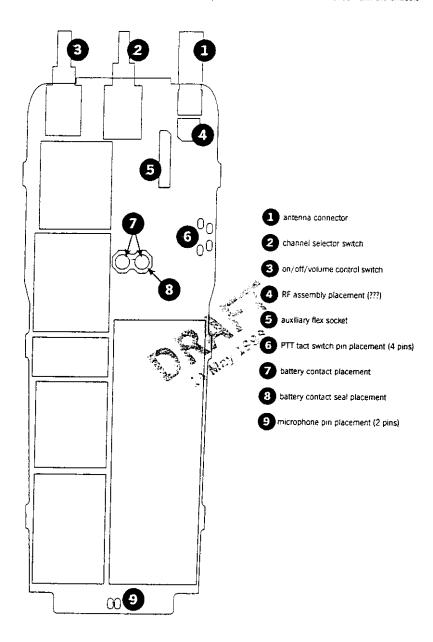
Top surface of PCB, which is visible only when the PCB has been removed from the chassis
